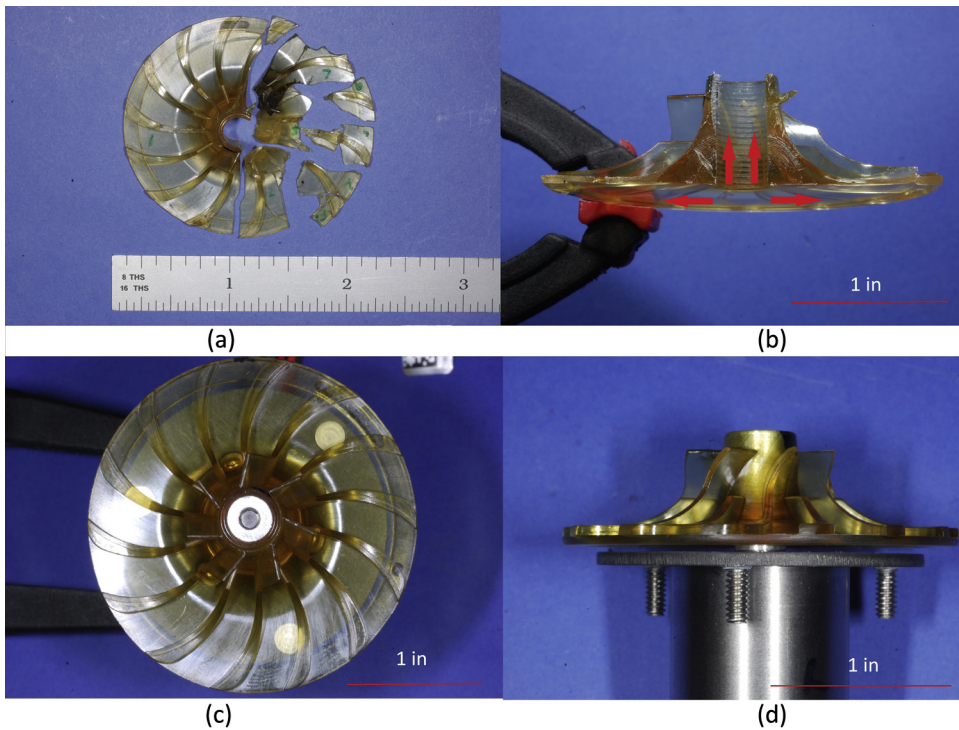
(a) Overall top view of impeller fragments reconstructed for observation. (b) Image of symmetric fracture faces along the radial split of the impeller, red arrows indicate direction of crack propagation. (c) Overall top view of non-fractured impeller with aluminum shaft press fit into bore. (d) Side profile view of non-fractured impeller.
